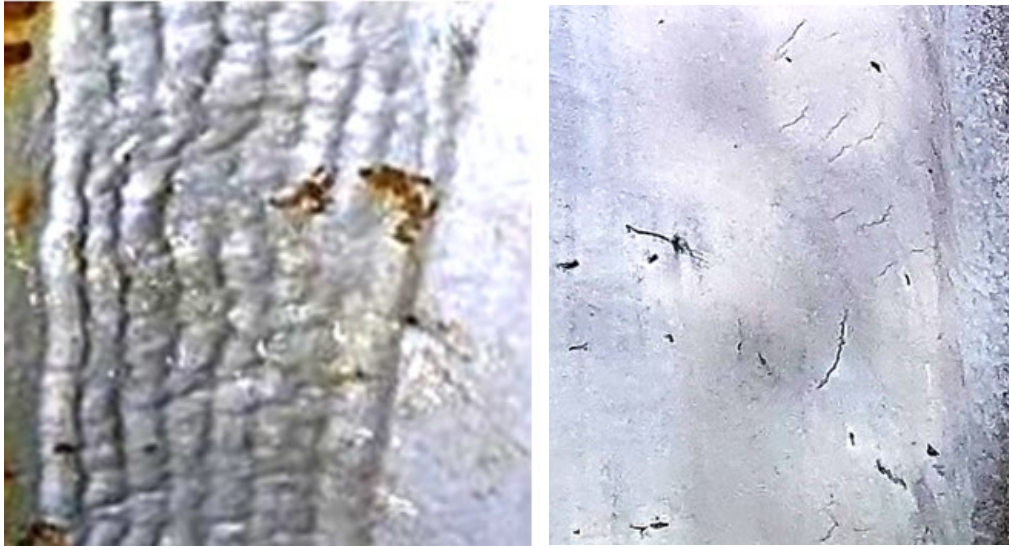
Left image shows irregular appearing weld zone in chord to rack weld examined after several year in service. Right image shows the same area after smooth grinding and magnetic particle testing.
